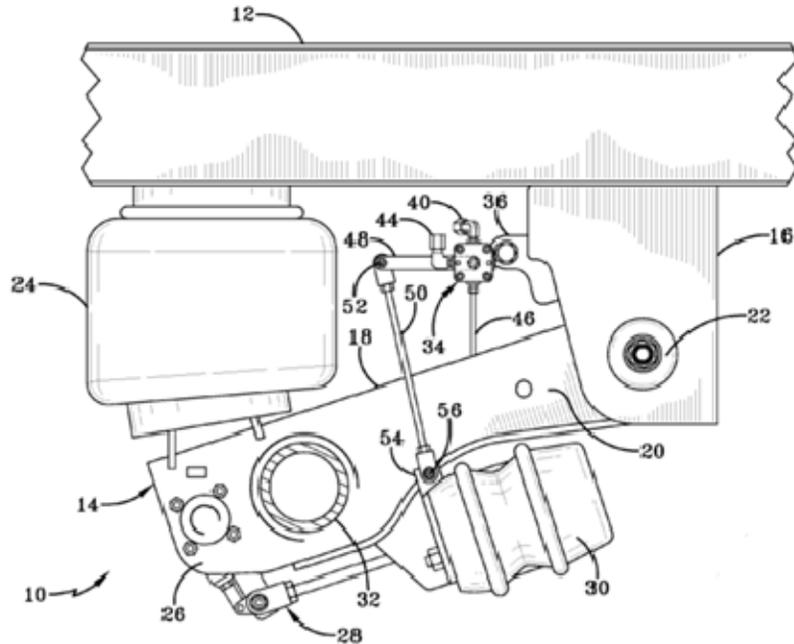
Mechanical Drawing of Leading Arm Air-Spring Assembly. 16 is the Frame Hanger, 32 is the Axle, and 24 is the Airbag. (Pierce and Cervantez, 2009)
